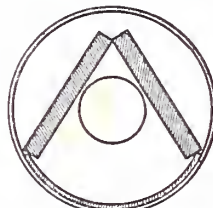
Section of Eye End of Tapering Tube, with Cap Removed (full size).
